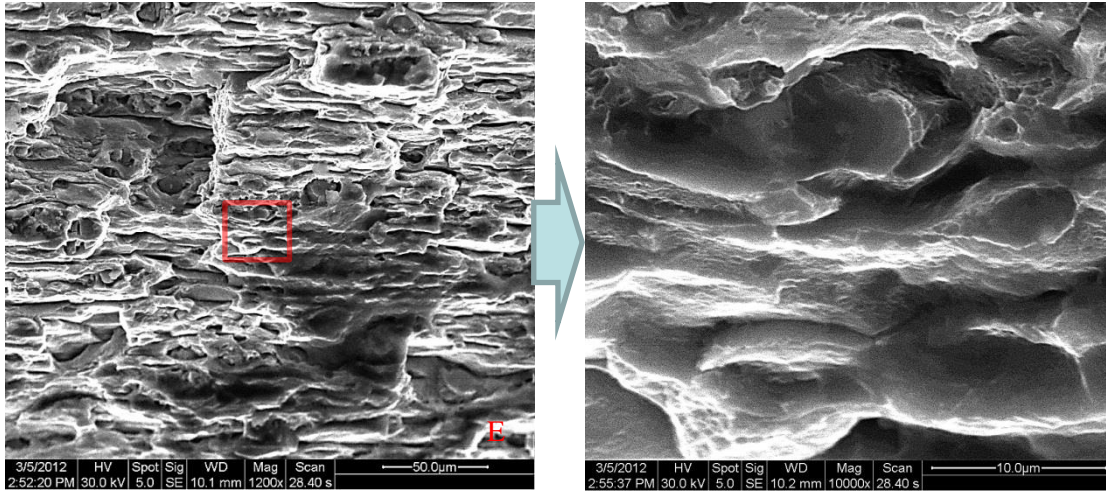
#3764 fracture surface structure further away from the worm hole, near the edge
